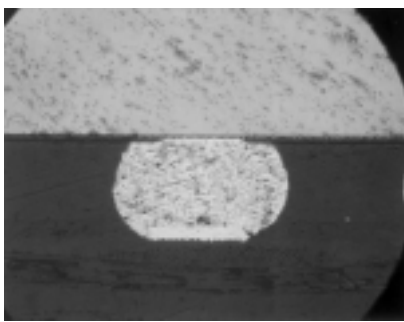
Micro SMD Solder Joint on NSMD Pad
